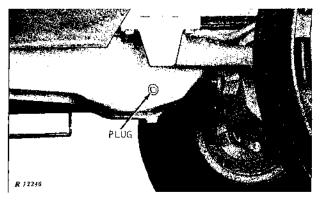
Plug for Crankcase Oil Heater Installation
